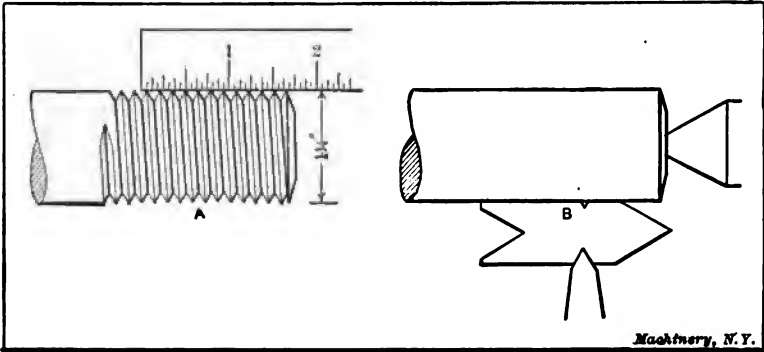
Measuring Number of Threads per Inch—Setting Thread Tool
